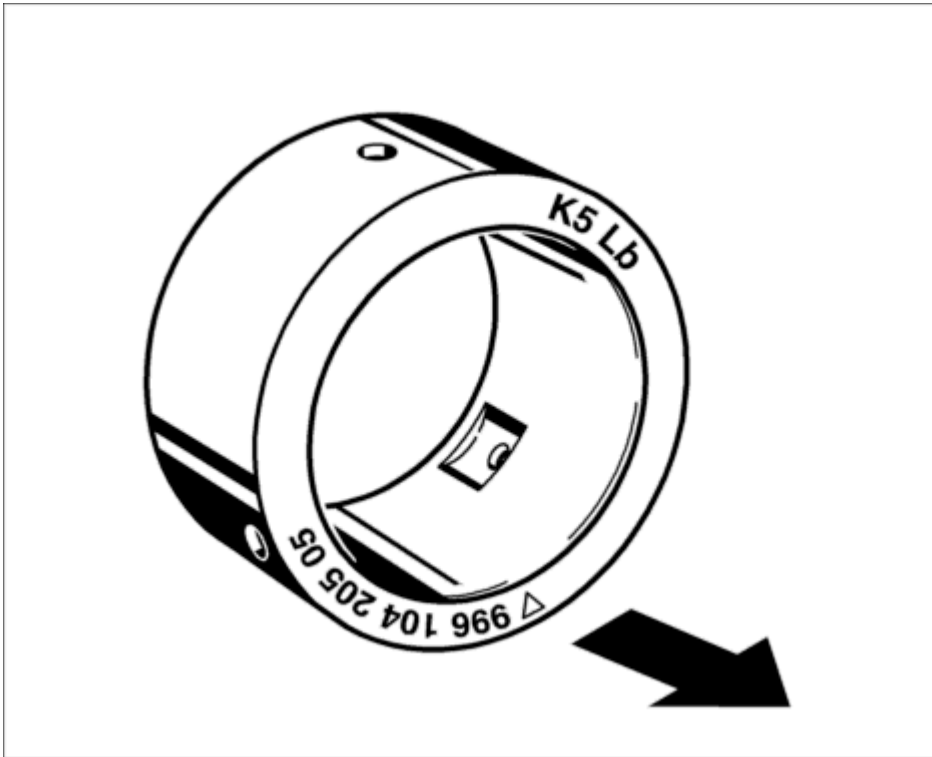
Direction of installation of bearing sleeve - identification towards camshaft
